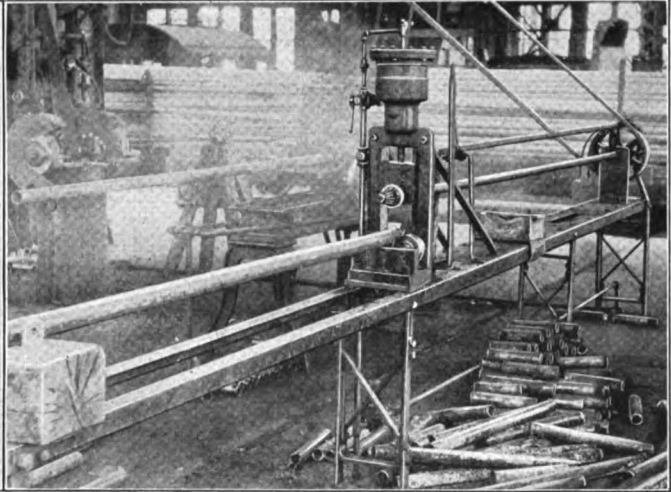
THE EXTRA-LONG CUTOFF MACHINE
